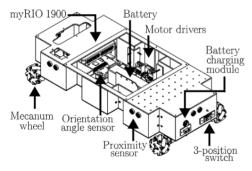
Isometric CAD view of the main components of the mobile robot.
